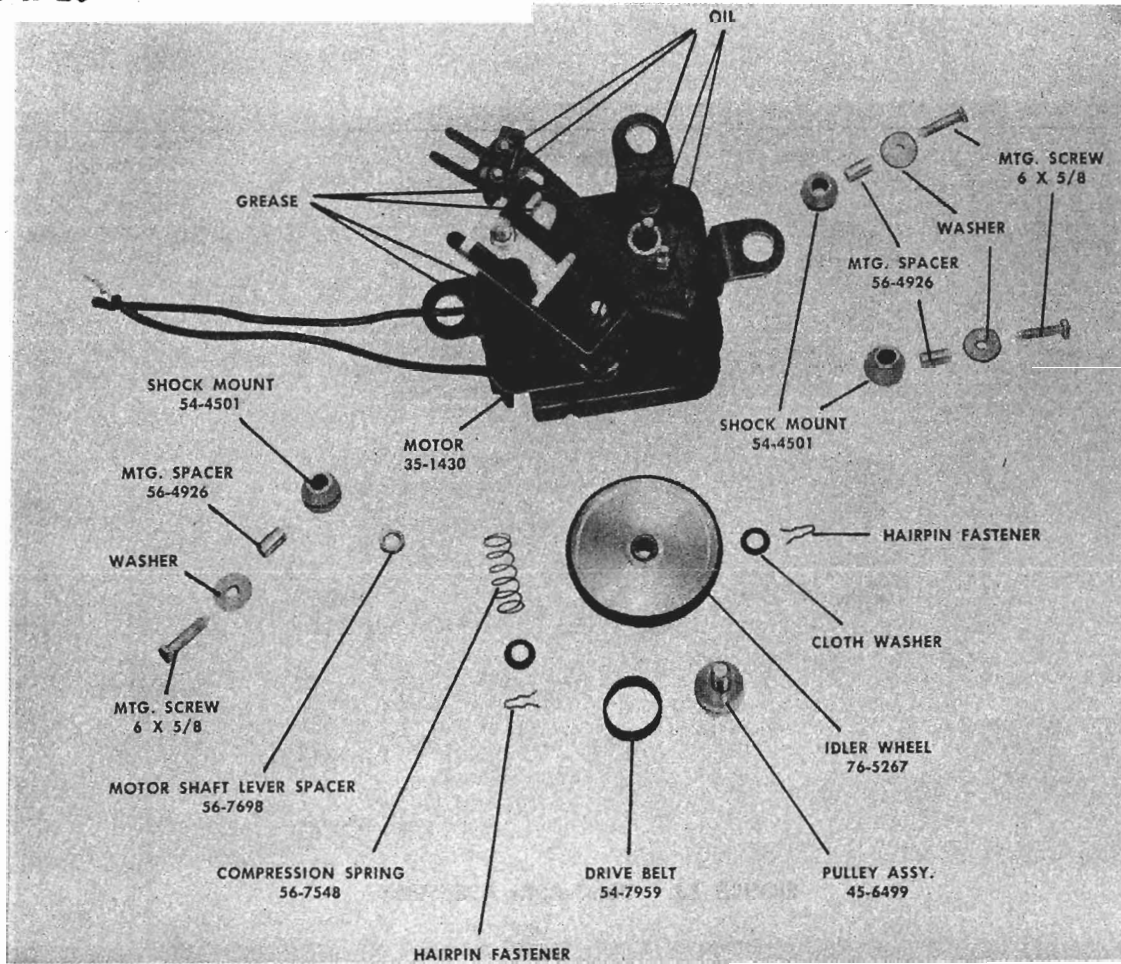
MOTOR ASSEMBLY—PART NO. 35-1430
